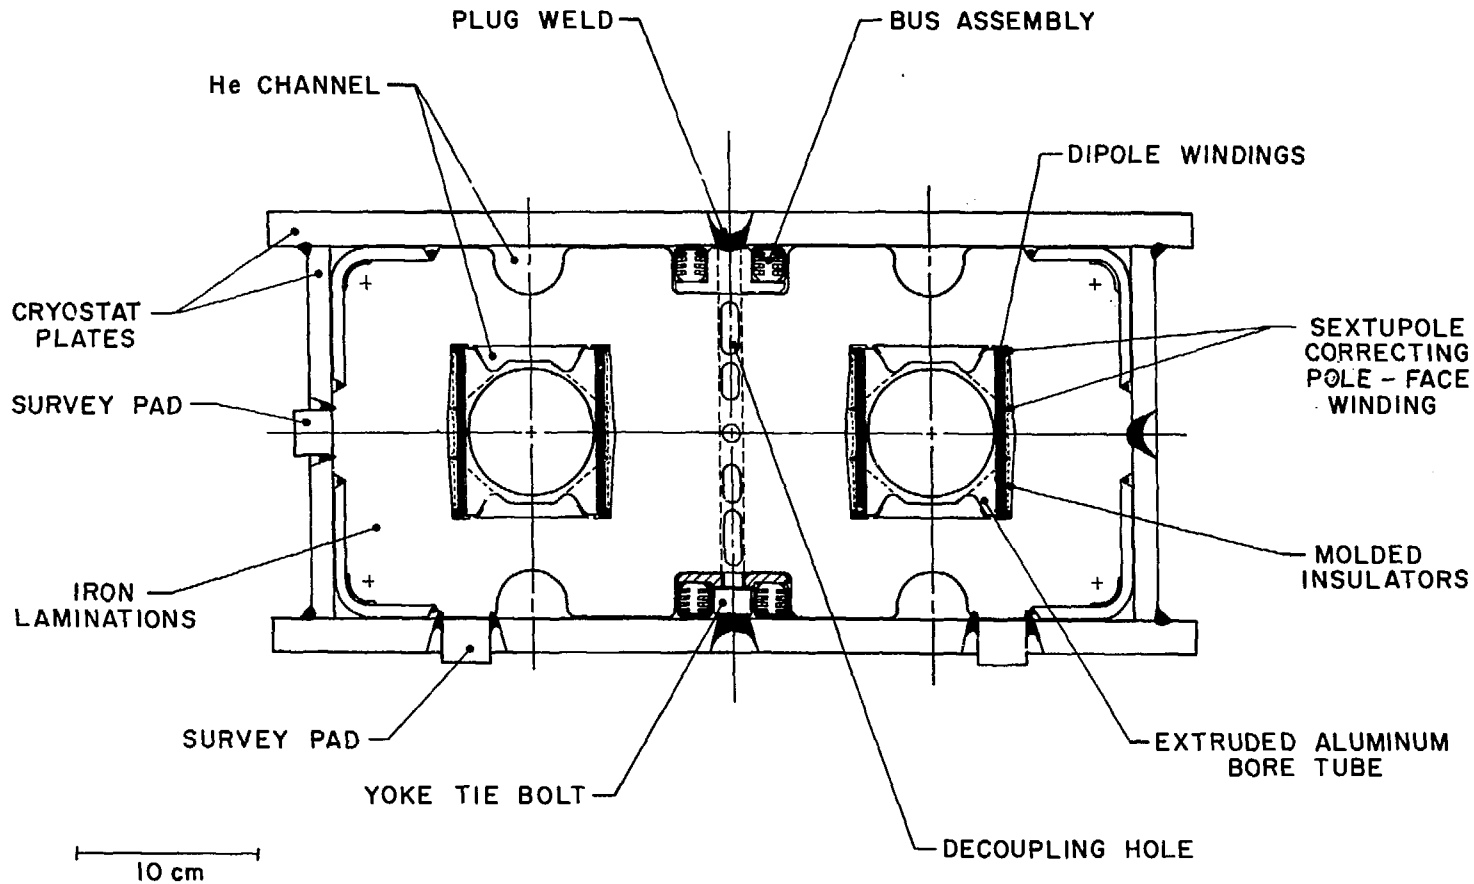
RHIC window frame dipole cross section. Center to center beam spacing is 22 cm.
